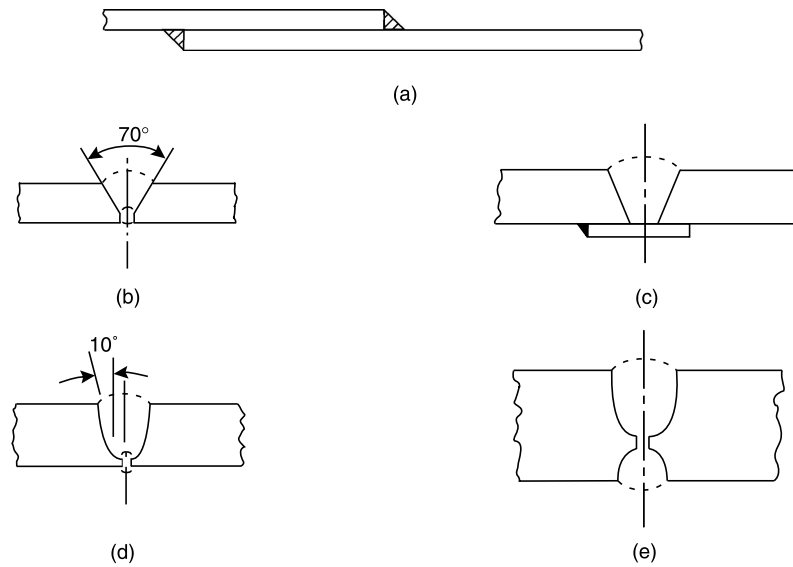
Weld profiles; (b to e) butt welds (a) Lap joint (b) Single 'V' (c) Backing strip (d) Single 'U' (e) Double 'U'
